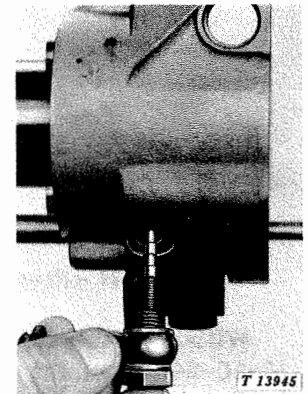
Housing Pressure Regulating Valve (Early Models)
